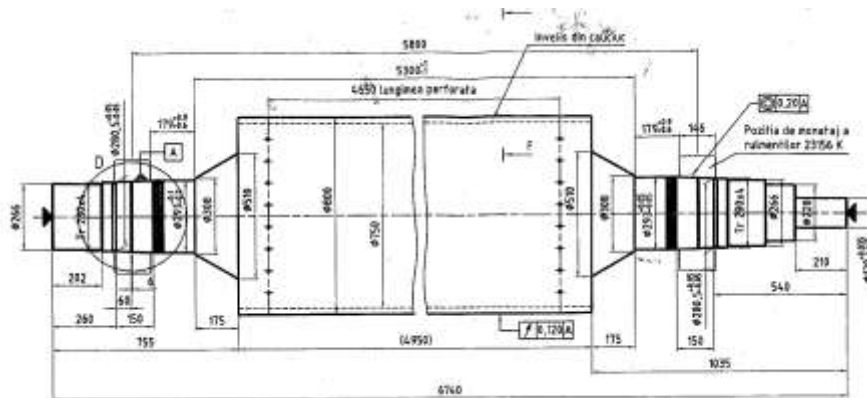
Roller with rubber shell subjected to grind on the roll grinding machine
